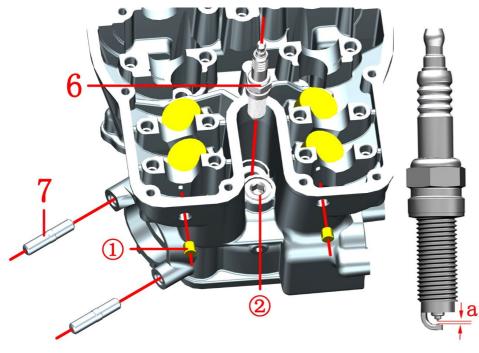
CYLINDER HEAD ASSEMBLY		Cylinder head assembly-3	CHK
